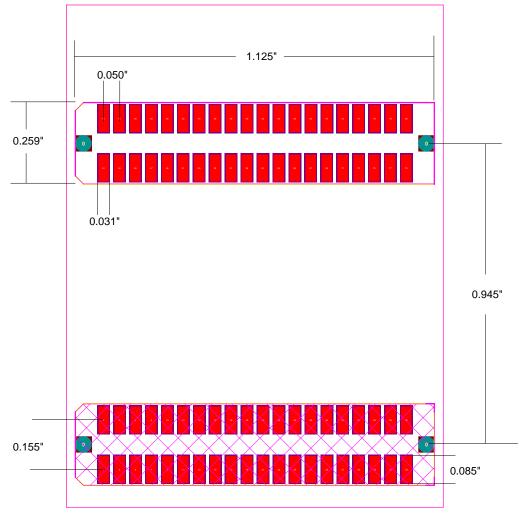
Board-to-Board Connector Dimensions for the EM359x Module
